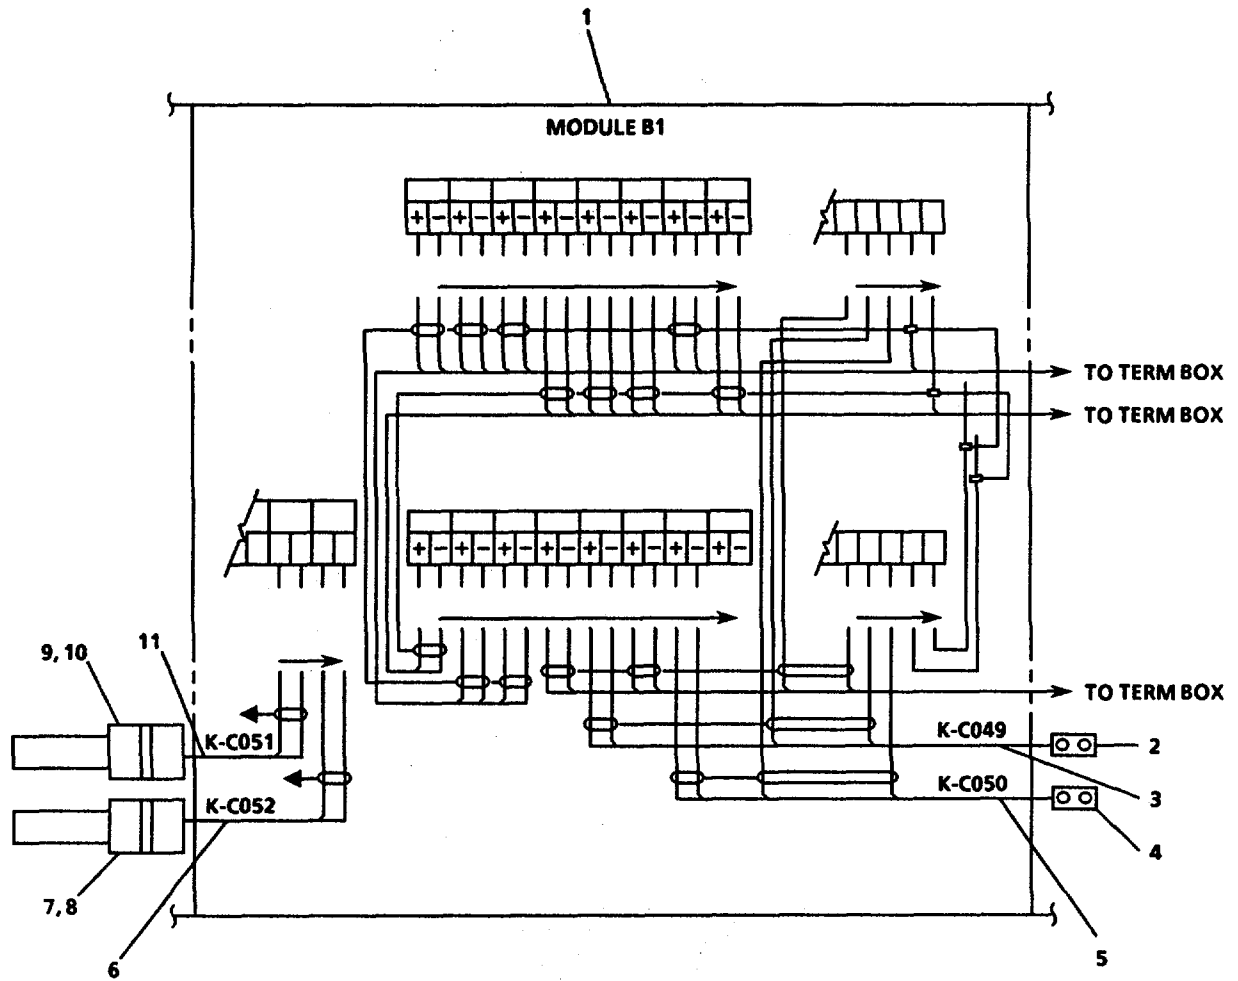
Analog Remote Module Assembly. Repair (Sheet 1 of 6).
